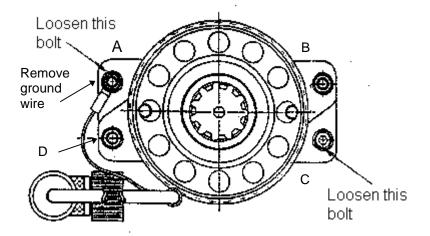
Powered Bolt - Top View (with Actuator Removed).
